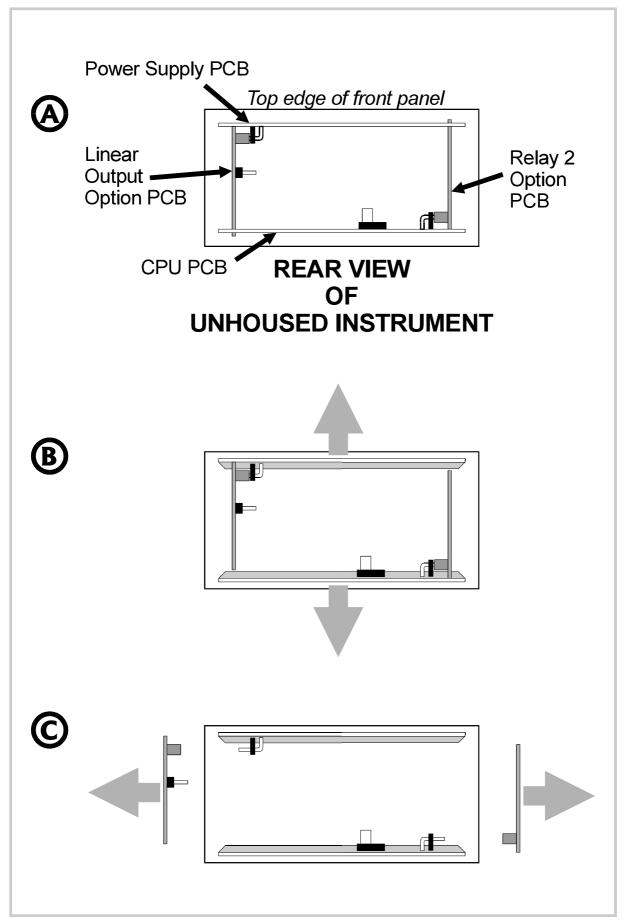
Removing the Relay 2/Linear Output Options PCBs
